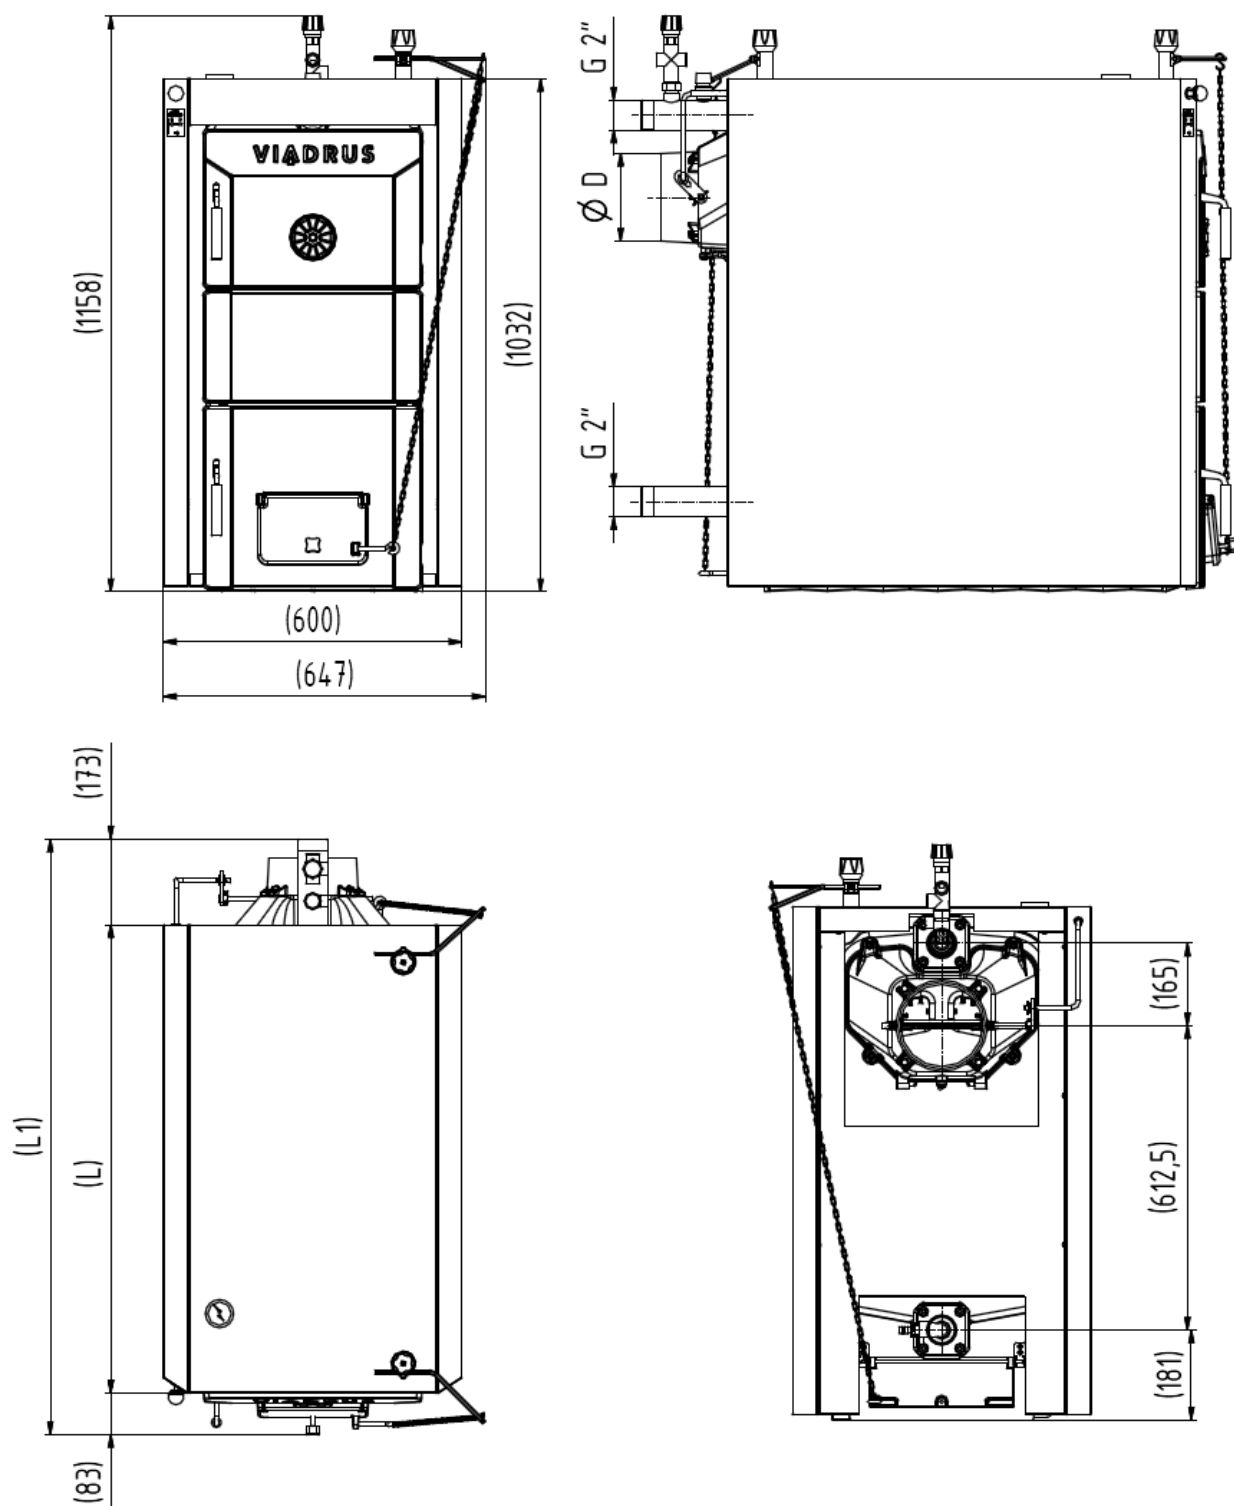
Connecting dimensions of VIADRUS HERCULES U 26 3 – 7 sect. boiler
